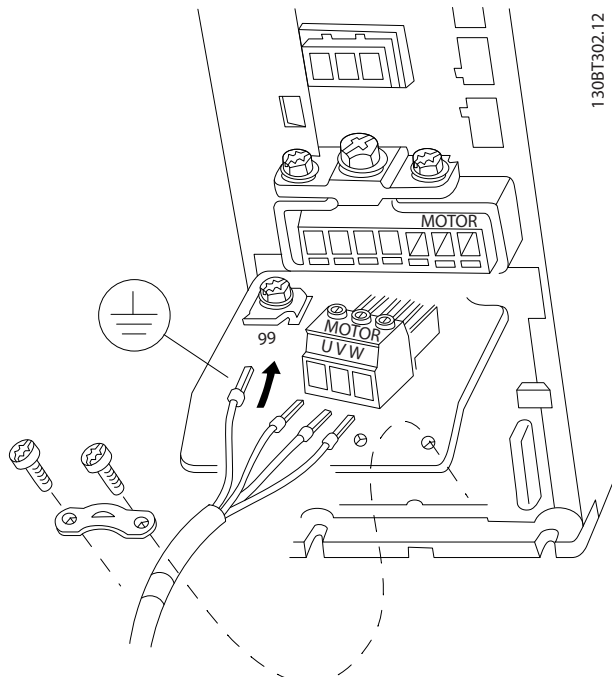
Connecting the Adjustable Frequency Drive to the Motor, H9 Enclosure
